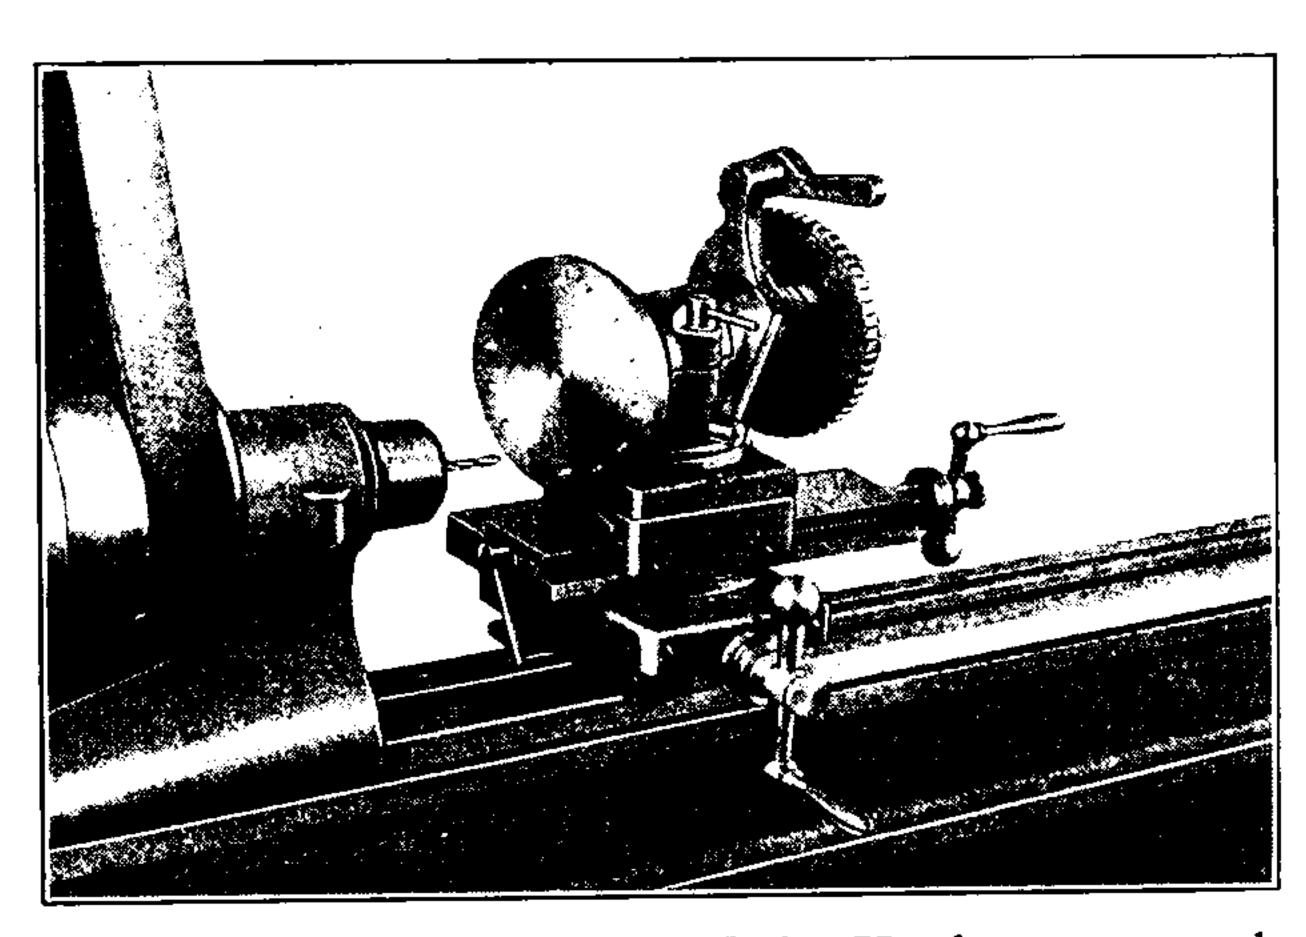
Milling Attachment Index Head on compound slide rest, drilling equally spaced holes at an angle
